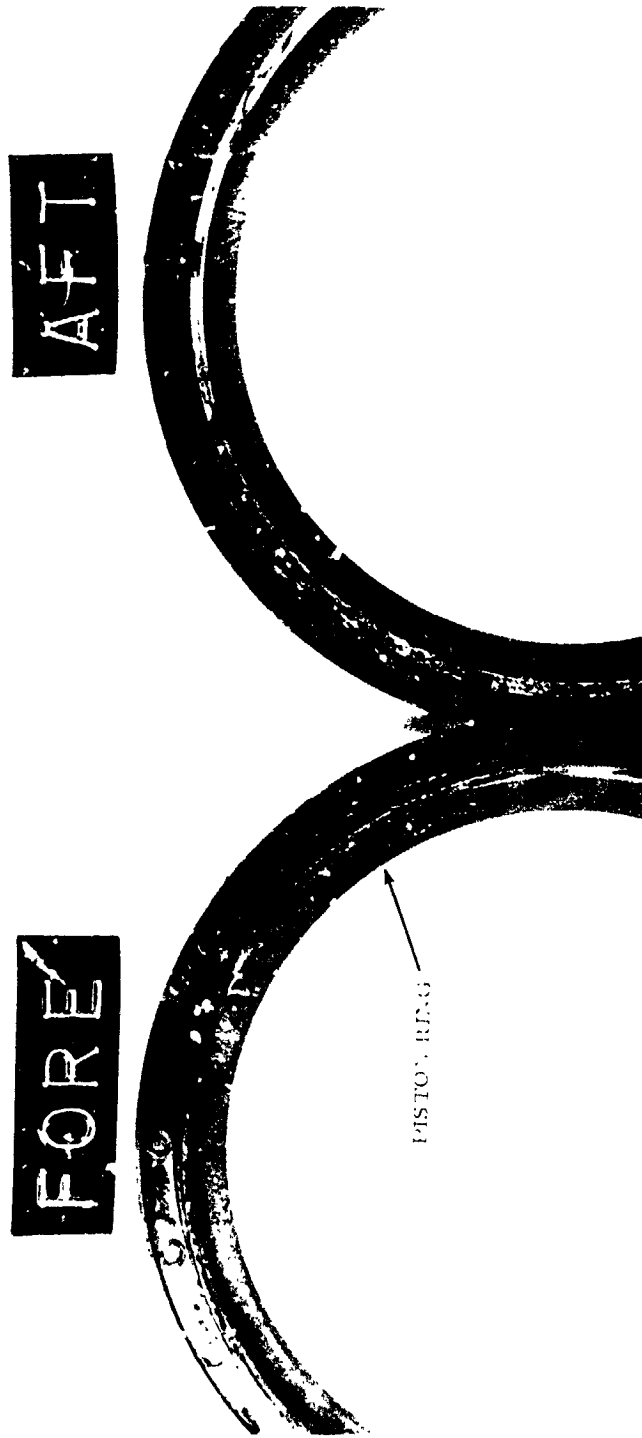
Self-Acting Face Seal, Piston Ring Carrier After Test 10.
